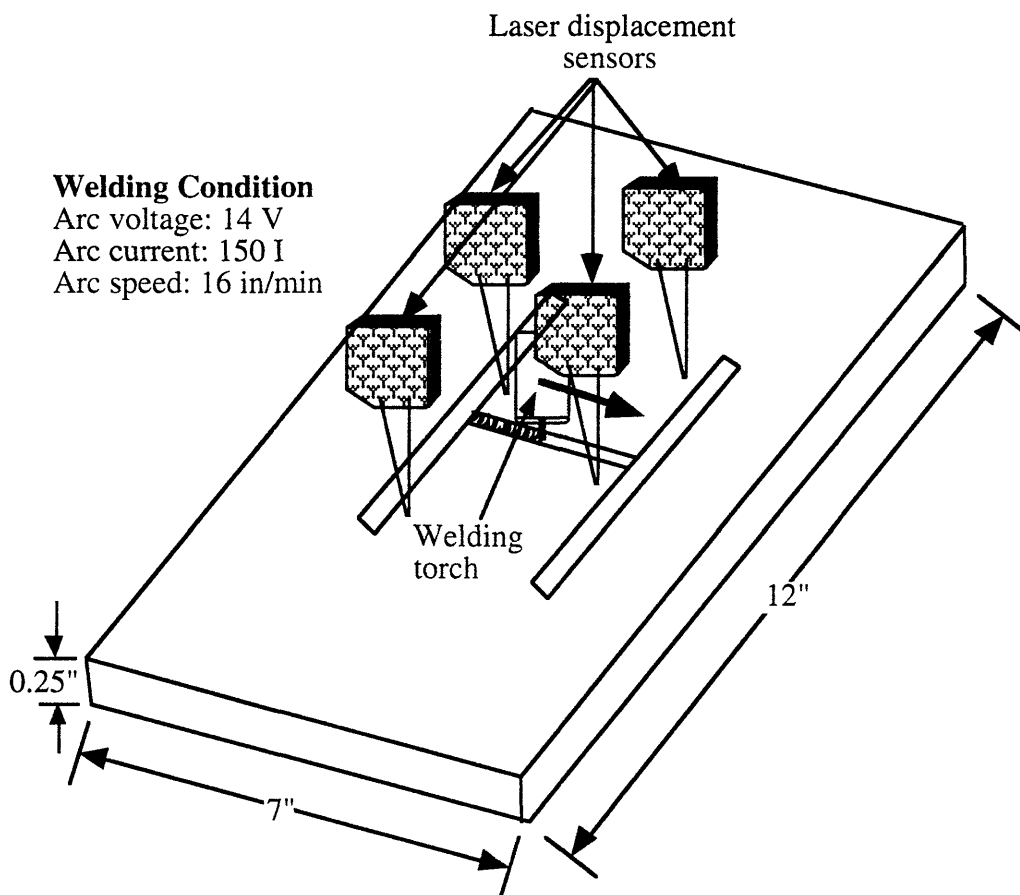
Experimental setup for measurement of transient movements during butt welding of steel plates
